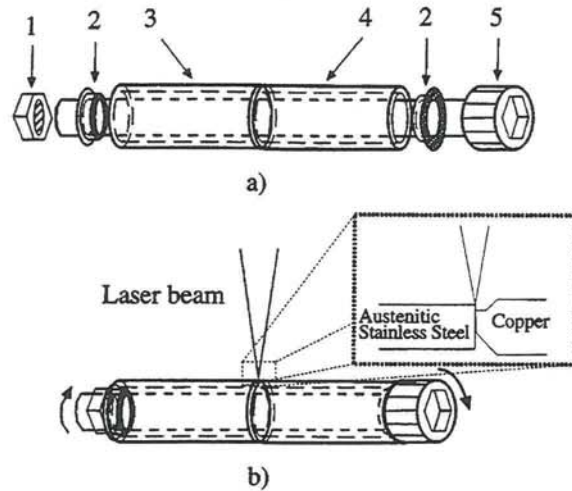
Experimental set-up when welding tubes, run 1. a) Schematic definition of the different parts in the fixture: 1. Bolt, 2. Support flanges, 3. Austenitic stainless steel tube, 4. Copper tube, 5. Screw. b) Schematic of the welding procedure and an enlargement of the weld zone. The screw is put through the tube and the support flanges before it is tightened to the bolt. This fixture did not allow the welded parts to contract during solidification.
